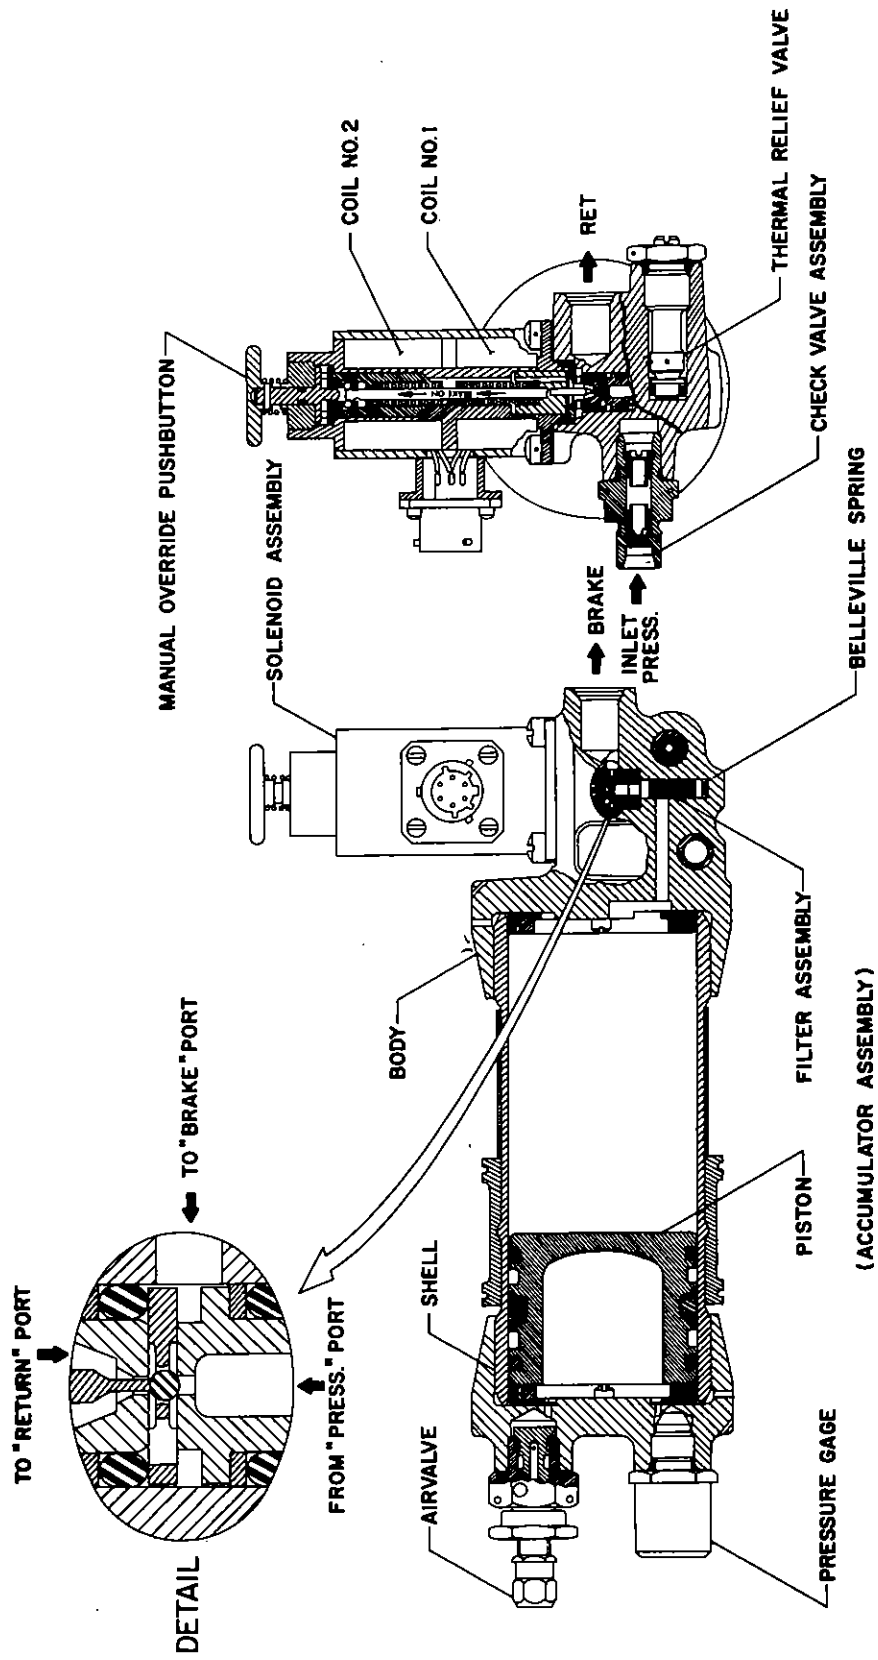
Rotor Brake Selector Valve and Accumulator Schematic
